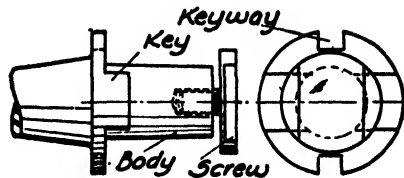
Shell End Mill and Face Milling Cutter Arbor.
